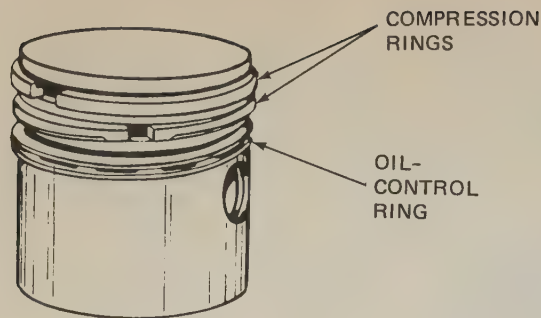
A piston for a four-cycle engine. Note that it has three rings: two compression rings and one oil-control ring.
